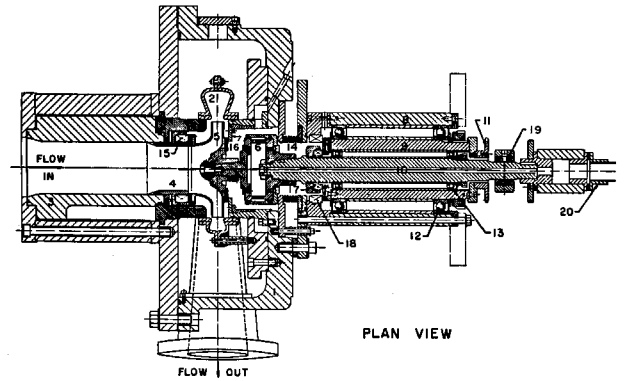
Assembly drawing of the test section and the eccentric drive mechanism. Pump housing (1), volute (2), inlet connection (3), inlet bell (4), impeller (5), rotating dynamometer (6), eccentric drive mechanism: outer and inner bearing carriers (8 and 9), main shaft (10), orbiting motion sprocket (11), outer and inner bearing sets (12 and 13), bellows (14), impeller front face seal (15), back seal (16), eccentric drive inner and outer face seals (17 and 18), air bearing stator (19), flexible coupling (20).
